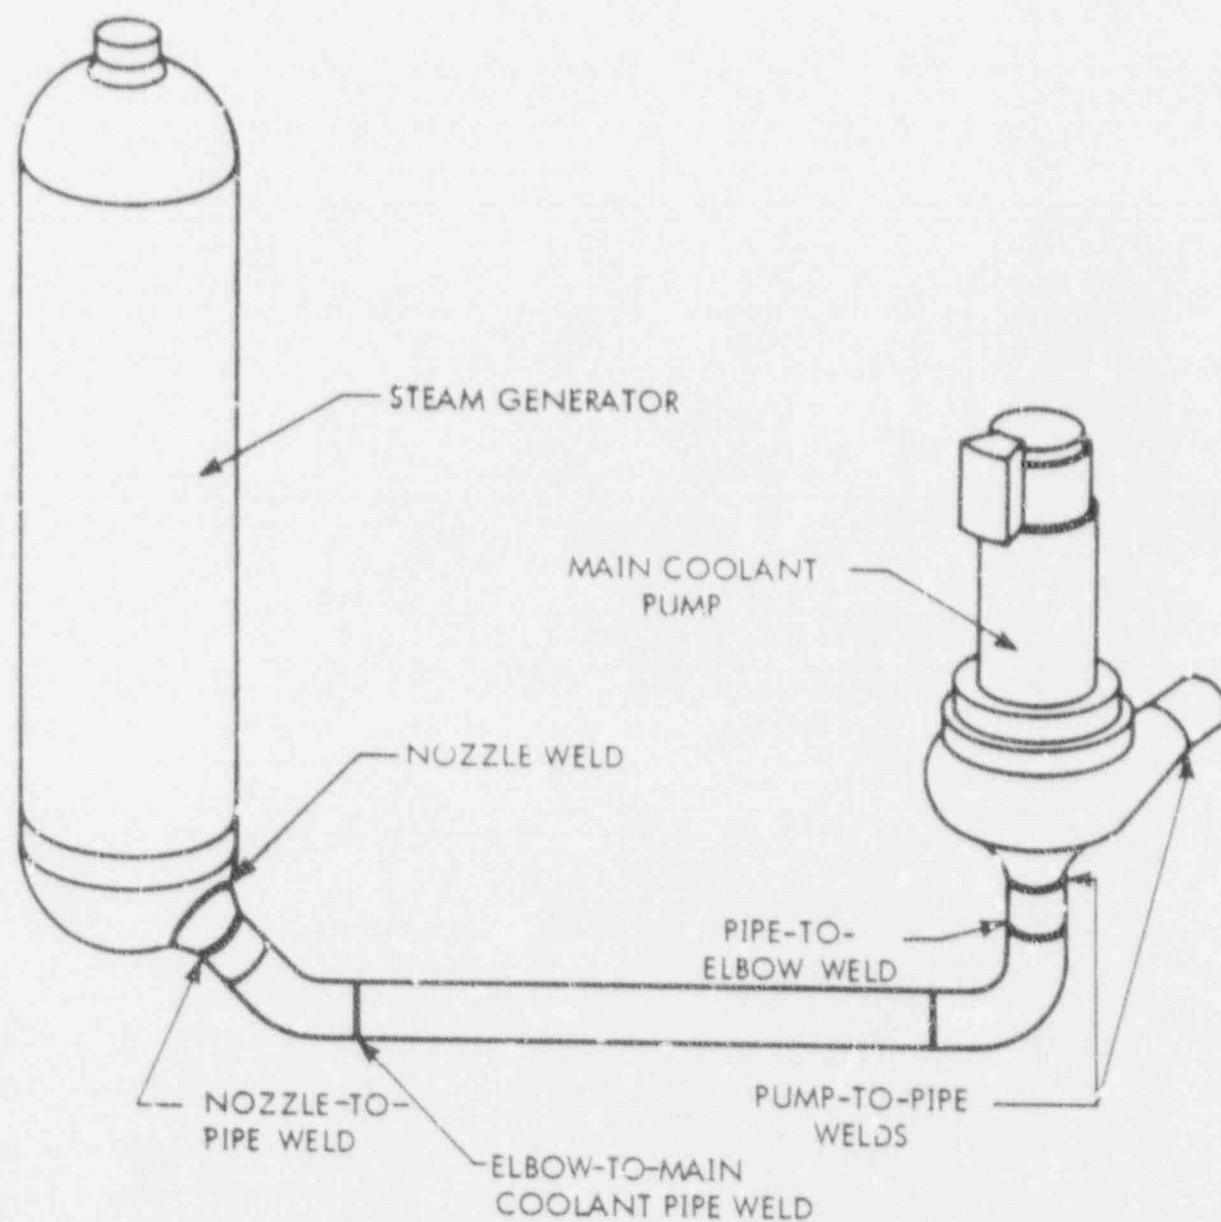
Schematic Diagram of Reactor Coolant Pipe Weldments
